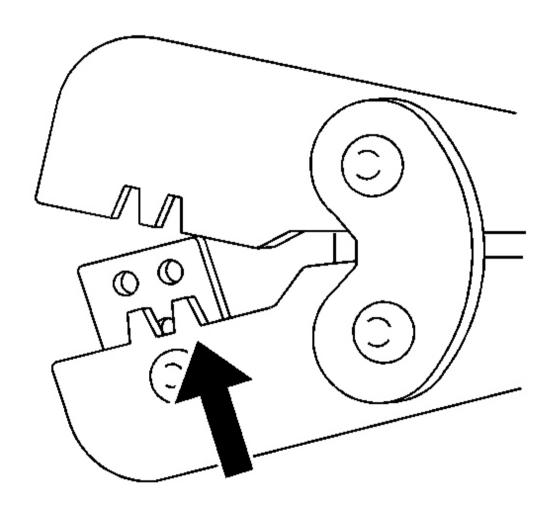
Identifying Crimping Tool Spring Loaded Locator Courtesy of GENERAL MOTORS CORP.
